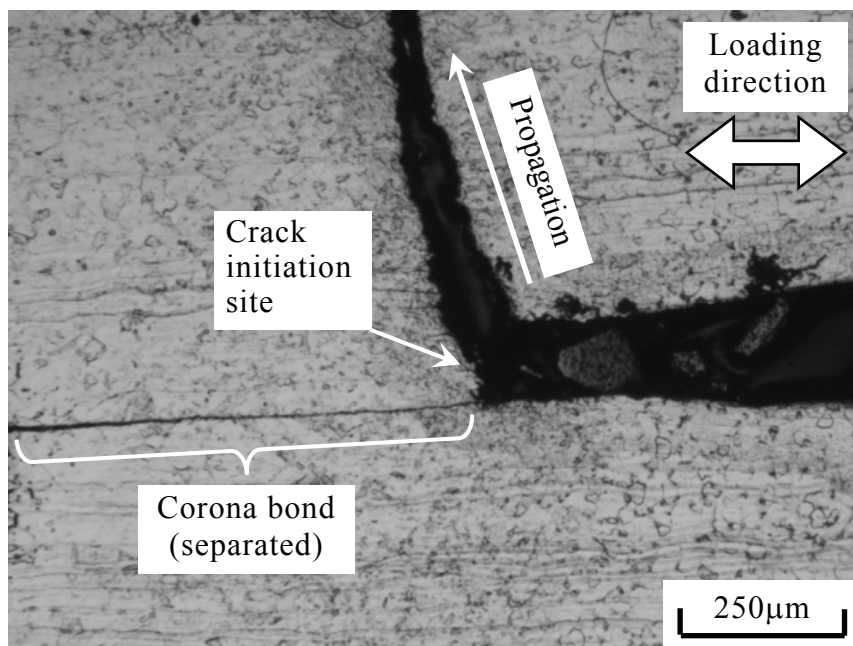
Cross section of spot welded joint in the vicinity of sheet separation edge after fatigue test (270MPa-grade steel).
